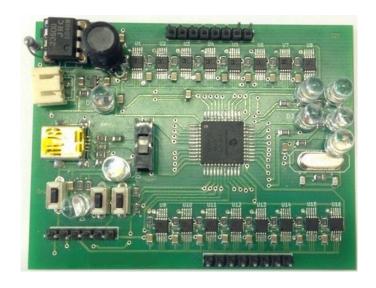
3D View of the PCB Design Using Microcontroller PIC18F4550
